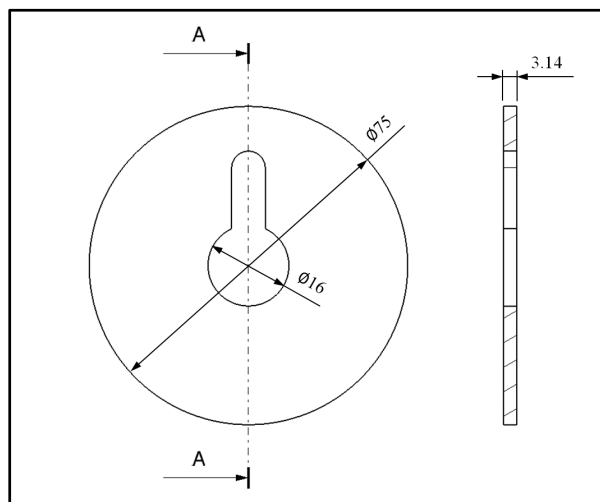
Workpiece used in machining tests (dimensions are in mm)
